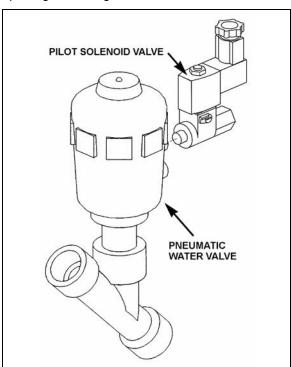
DRIVER'S HOT WATER PNEUMATIC VALVE ASSEMBLY 22240
